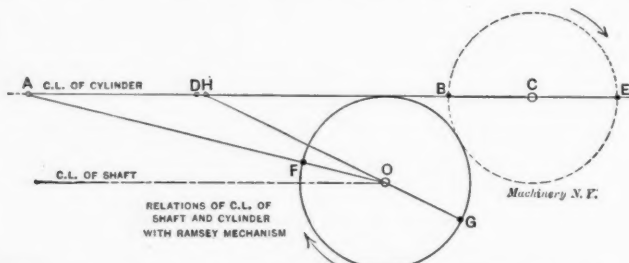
Novel Crank Arrangement for Internal Combustion Engines.
